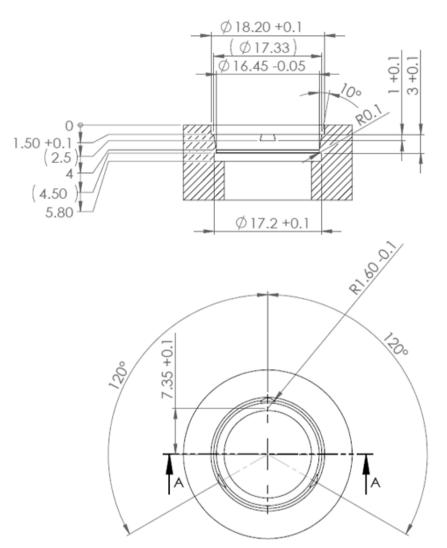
Dimension drawing: Workpiece drill hole for mounting the MDS D522 special version
